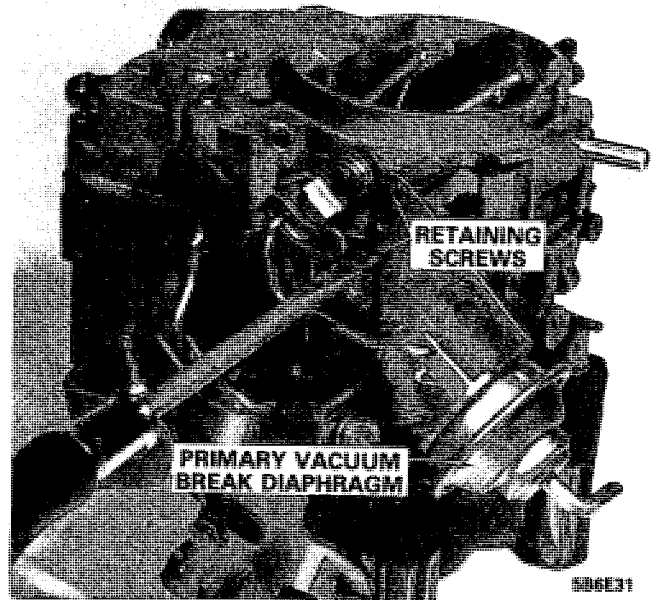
E-31 - Removing Primary Vacuum Break Diaphragm
